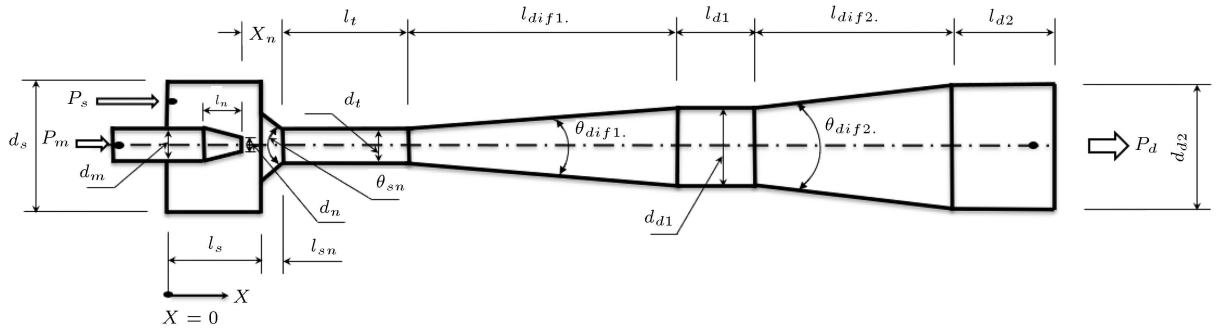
Characteristic dimensions of the axial-jet-pump geometry using a modified mixing chamber system.
